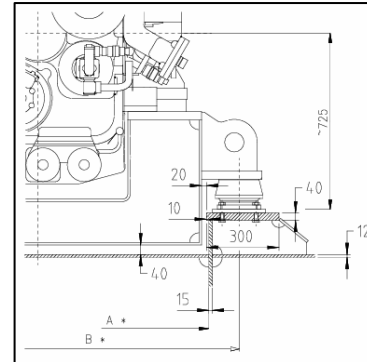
Detail View of Engine Mounting Dimensions.
